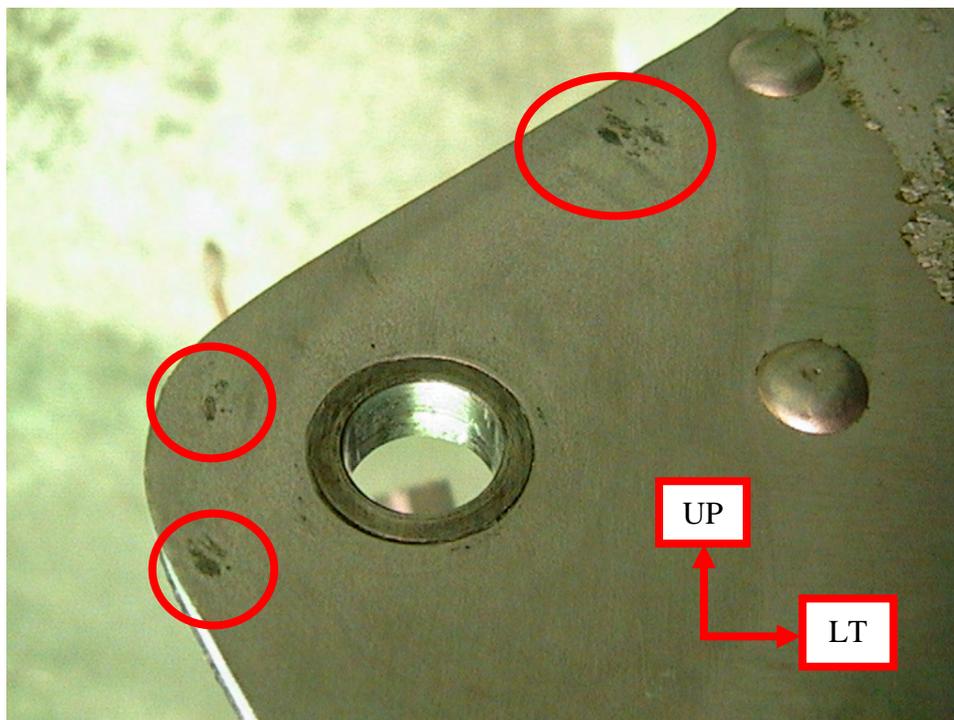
Corrosion on the Left Wing Front Spar Wing Side Attachment Point WS 30
